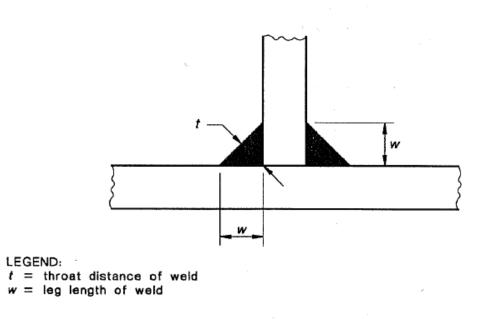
Dimensions of Intermittent Fillet Welds
